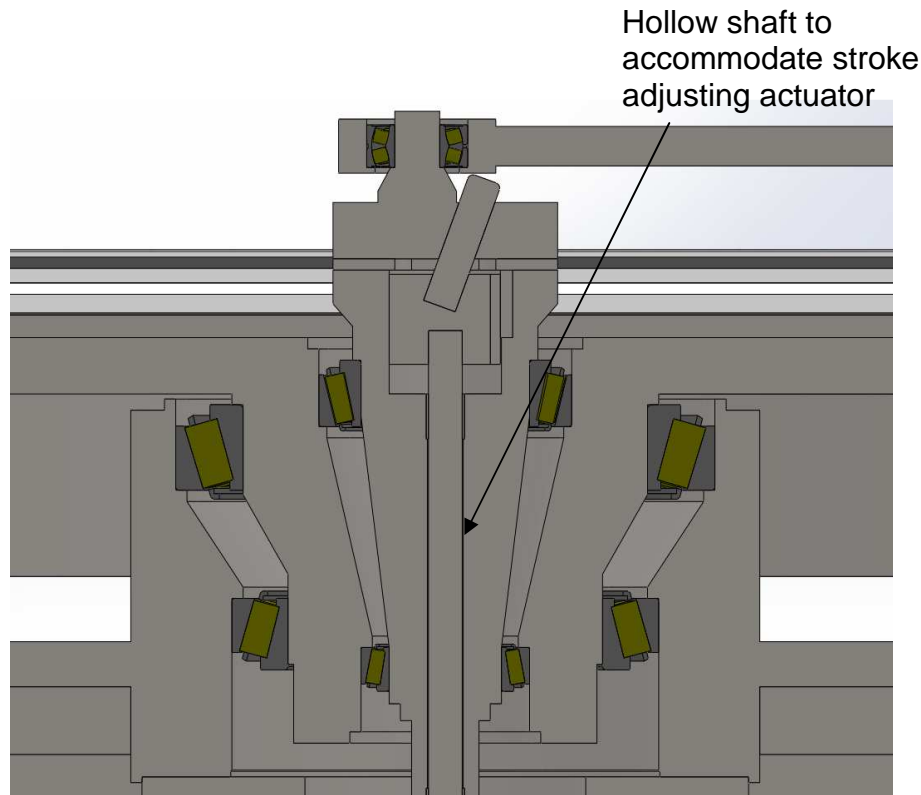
3D CAD model of early concept showing hollow drive shaft required for the dovetail slide mechanism
